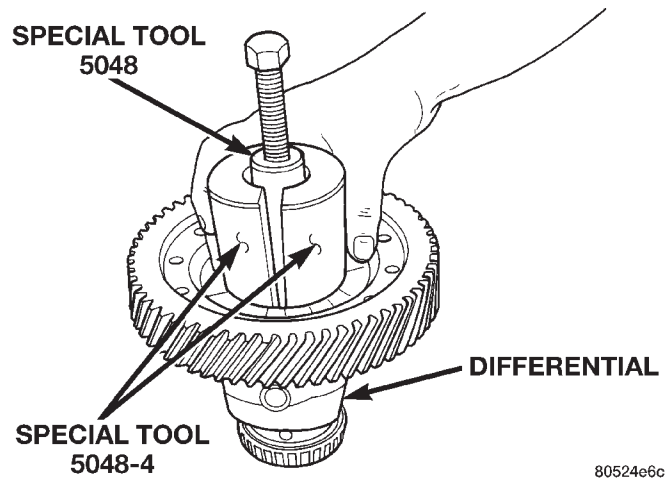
Position Tool 5048 Over Button and Collets at Differential Bearing (Ring Gear Side)
